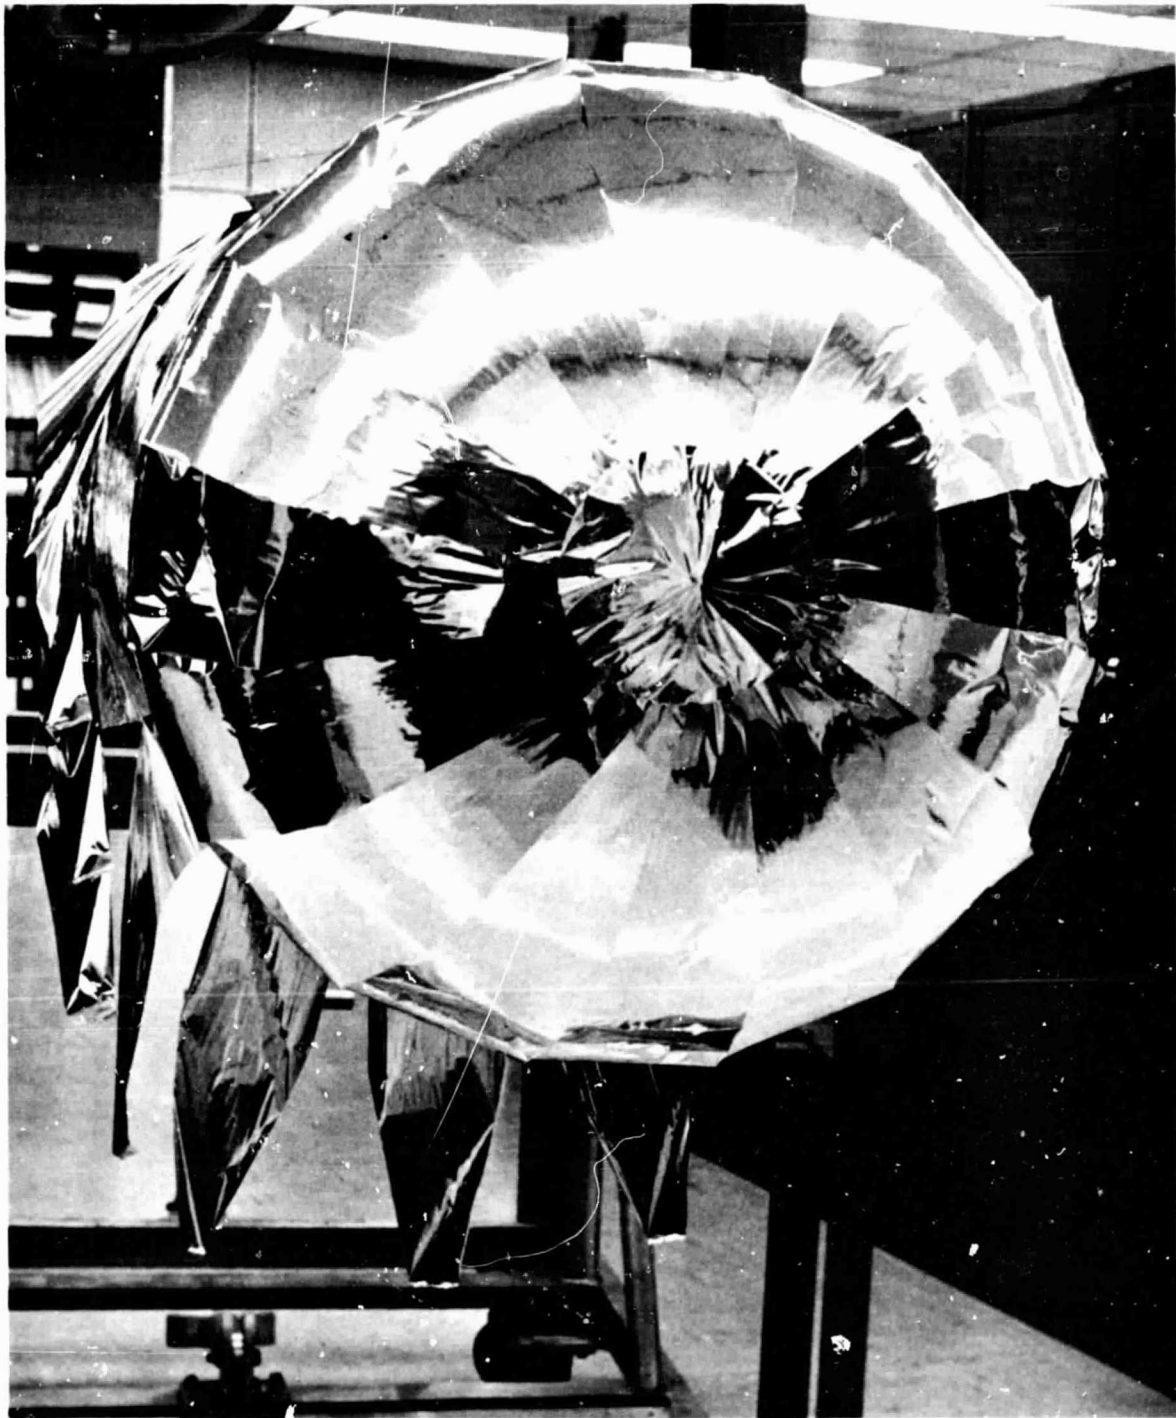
Tank During Wrapping Process Showing Completed Mylar End Layer
